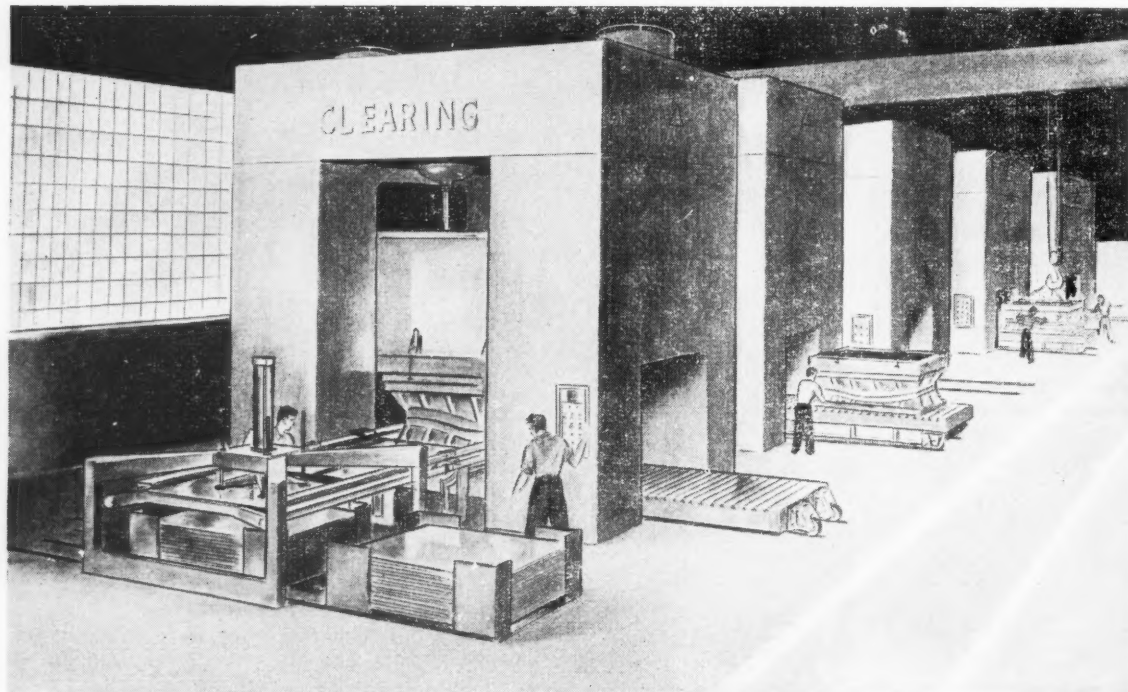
"Push-button" die setting, used in changing parts in a press or line.
